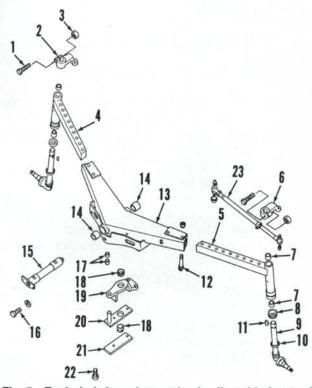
Exploded view of swept back adjustable front axle used on some tractors. Refer to Fig. 1 for legend except for tie rod assembly (23).
